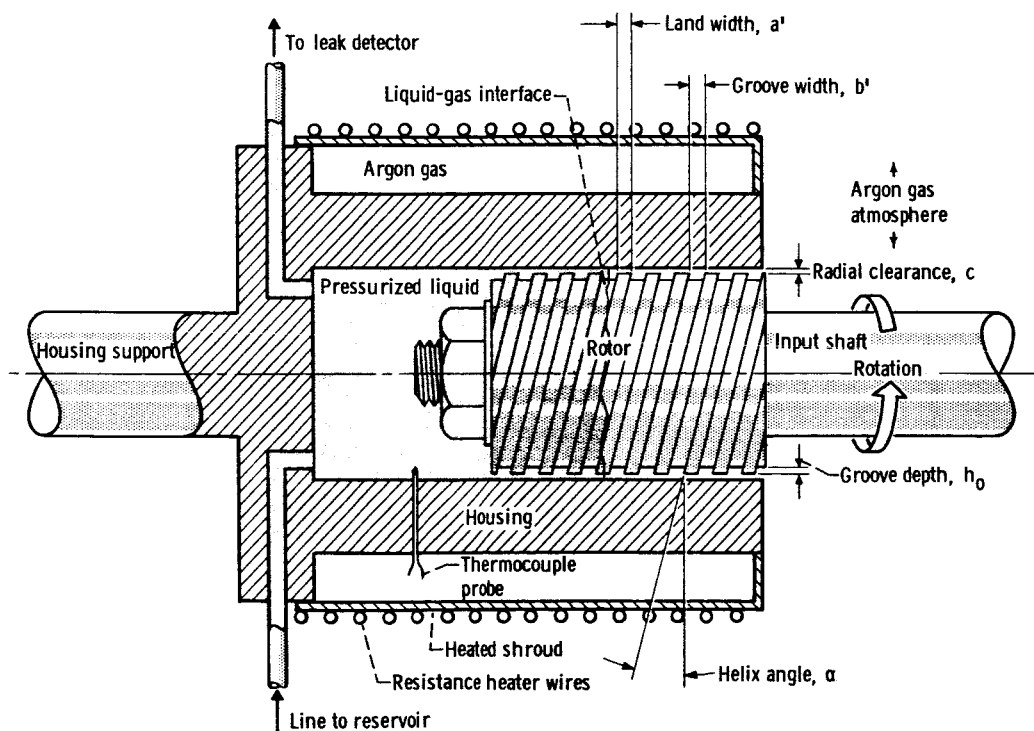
Grooved rotor viscoseal used to seal sodium.
